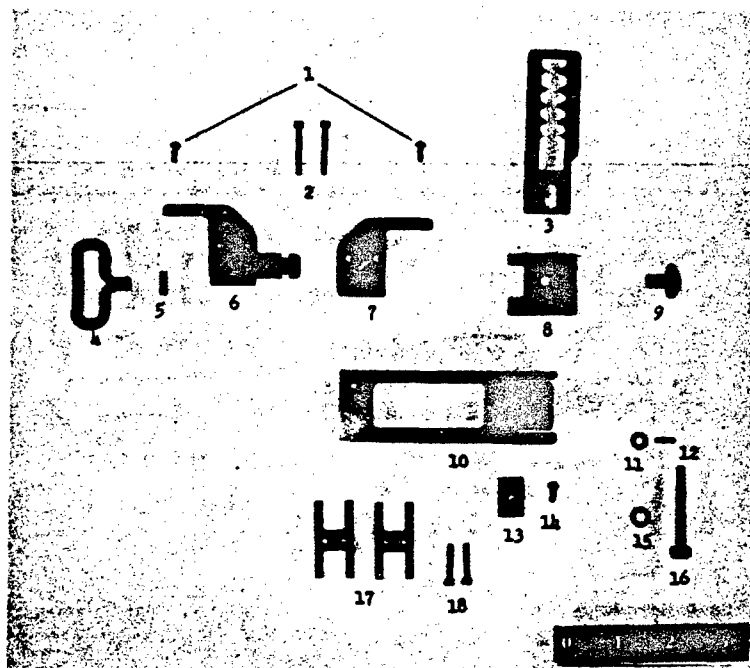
(U): Disassembled View of Sight for Pump and DBCATA Launcher (U).
